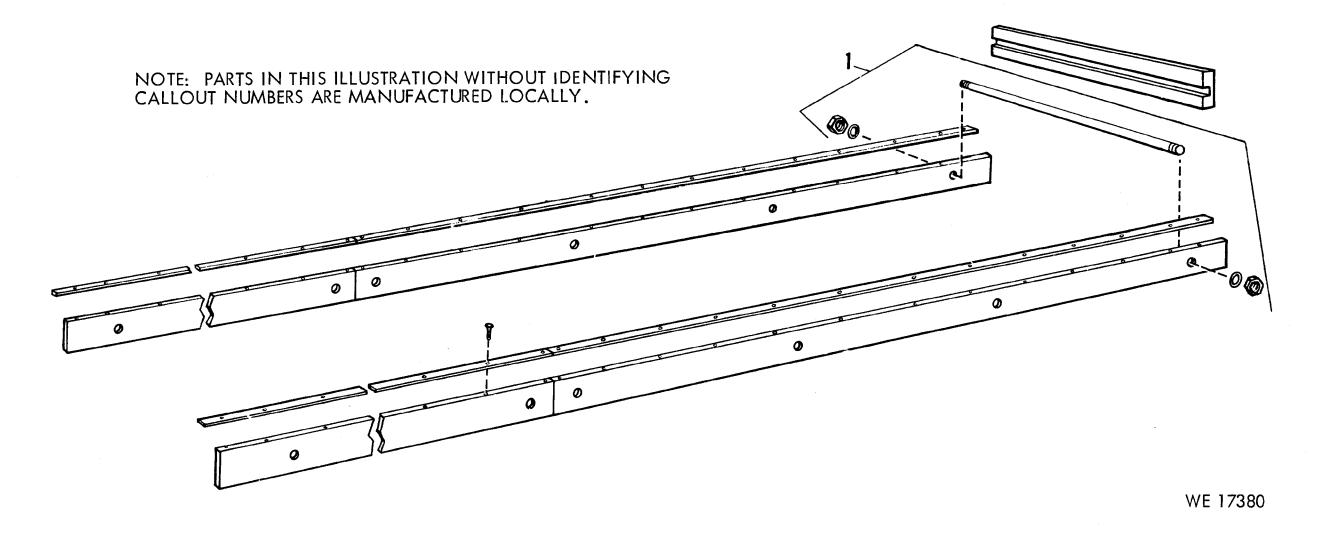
Rolling Target Track Assembly for Machine Gun Rolling Target Frame 5559725
